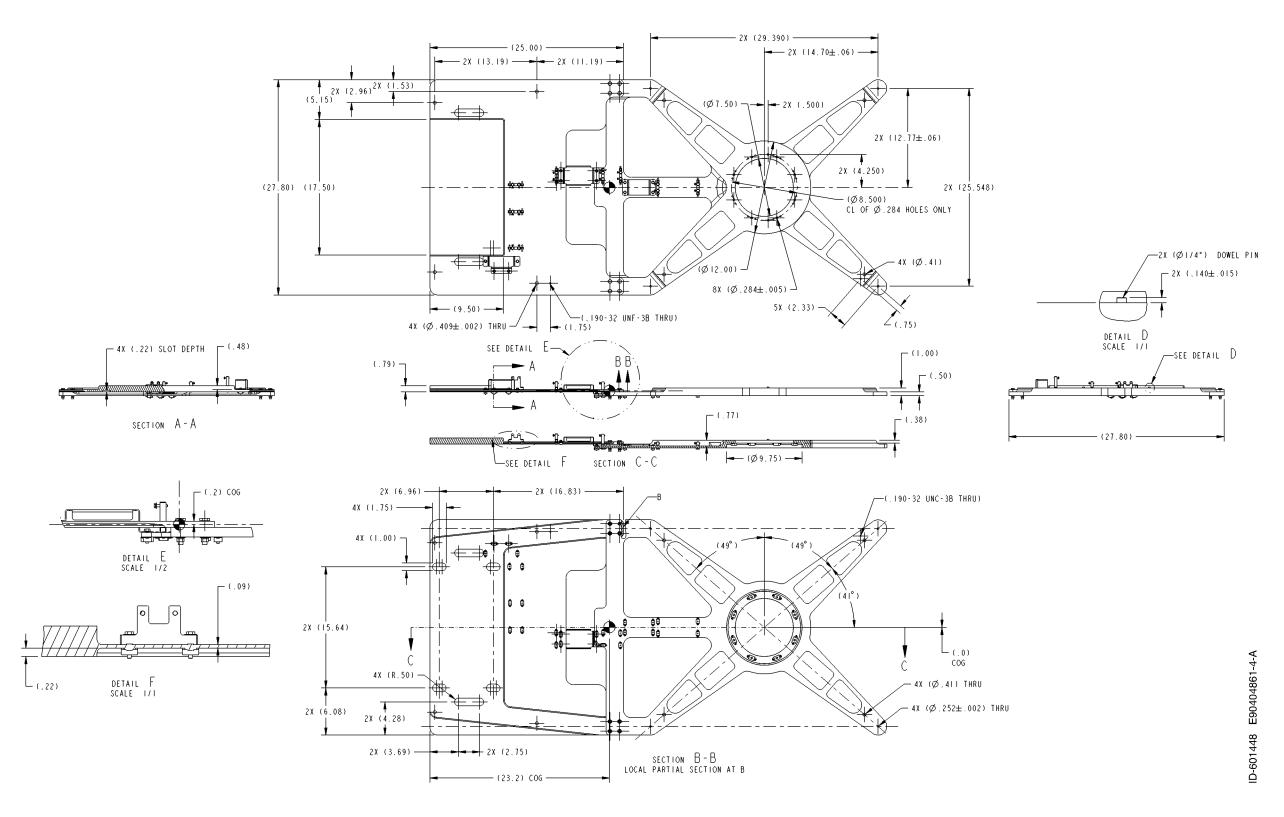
(Sheet 4 of 4) LAIM Outline and Installation Drawing (90404861, REV A)
